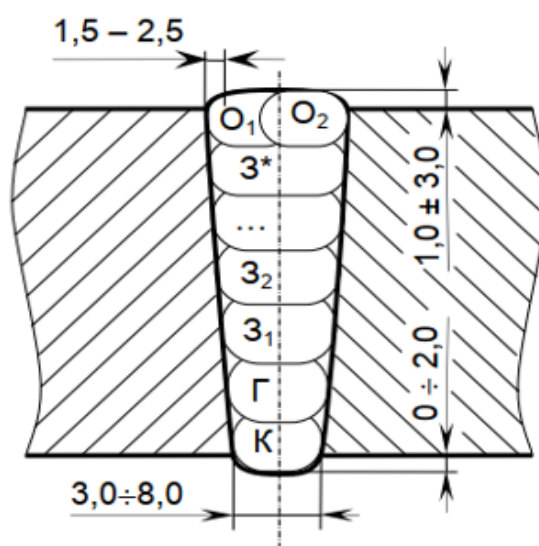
Geometric parameters of the weld made by the Saturnax welding system
